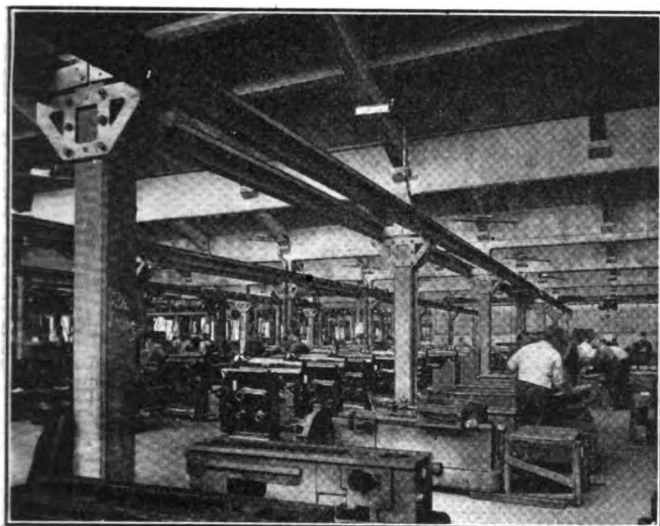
SCRAPING DEPARTMENT. NOTE CLAMPS ON THE CONCRETE POSTS FOR SUPPORTING CRANE RUNWAY
